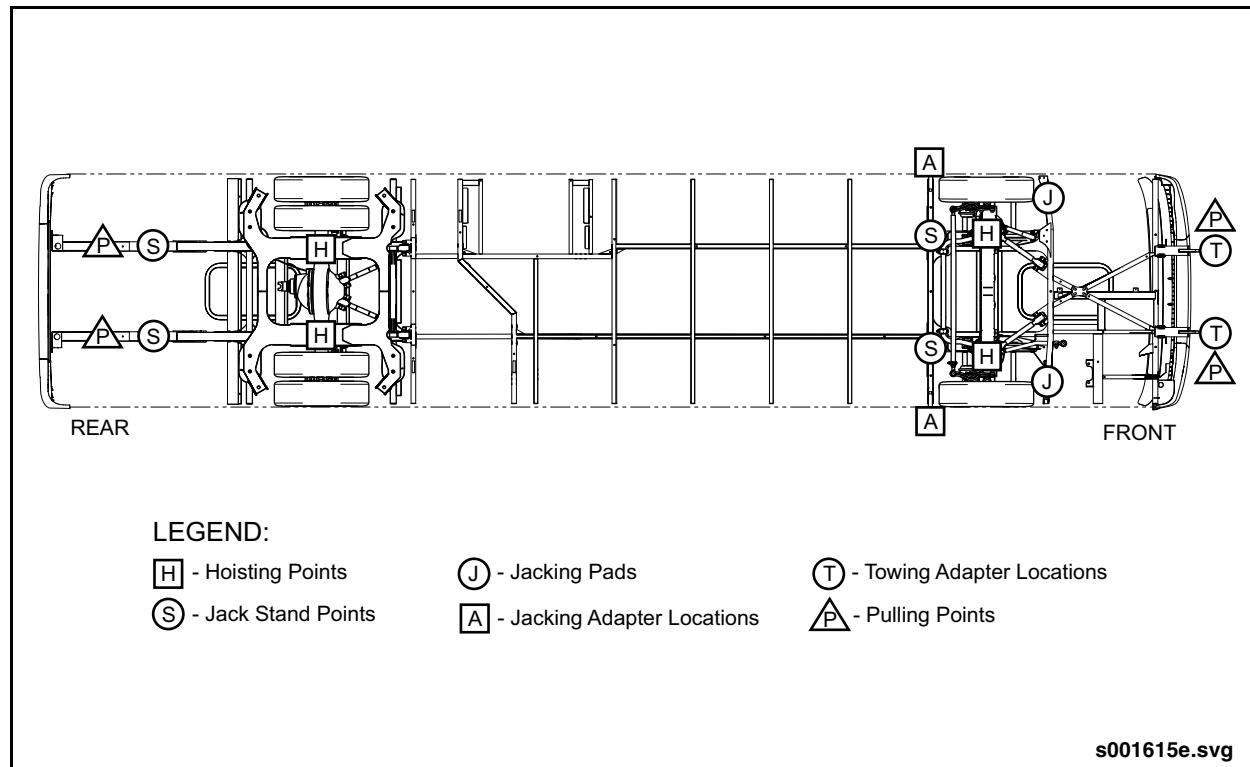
Jacking (hoisting) Points & Stand Placement
